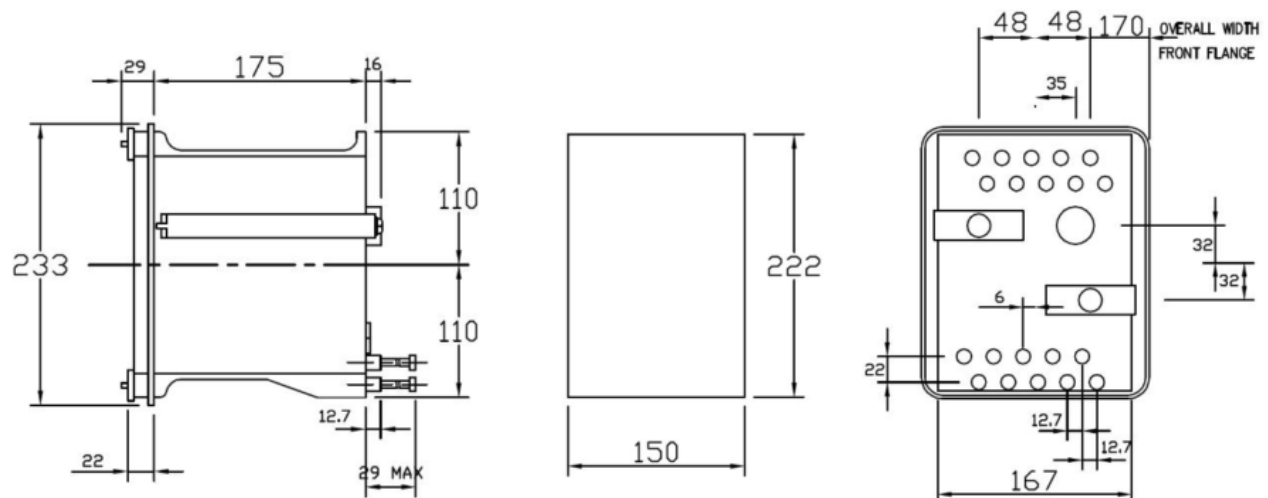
Case and Panel cut-out dimensions for case 1D (all dimensions in mm)
